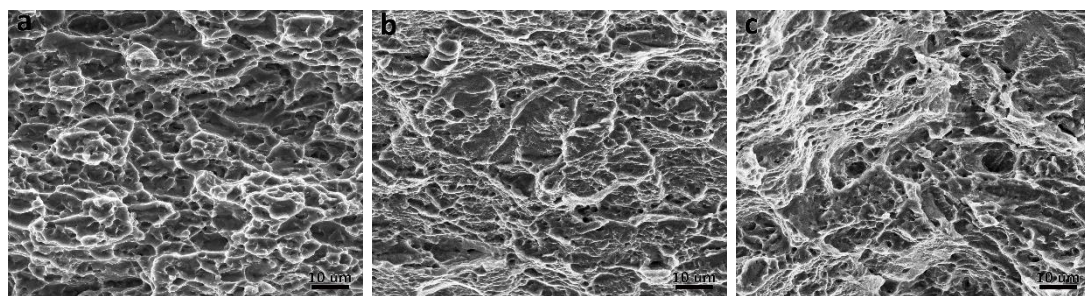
Fracture morphologies of EBW Ti64 welds after tensile testing at room temperature: (a) Sample 1 (1 mm); (b) Sample 2 (4 mm); (c) Sample 3 (5 mm).
